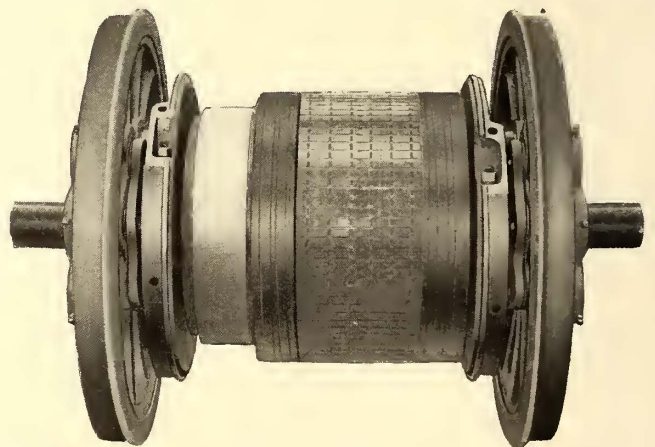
A PAIR OF DRIVING WHEELS, WITH ARMATURE AND BEARING HOUSINGS FOR SUPPORTING FIELD FRAME
